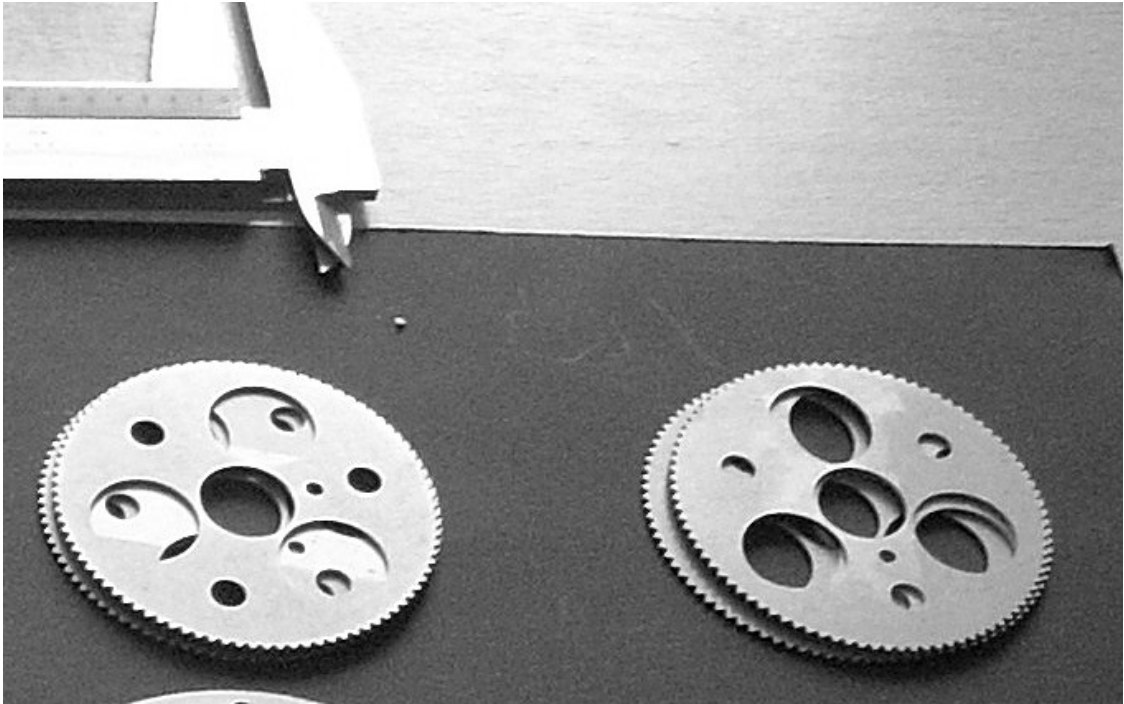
Cut components of a set of input and output wobble gears for the $\frac{1}{4}$ -turn Actuator.
